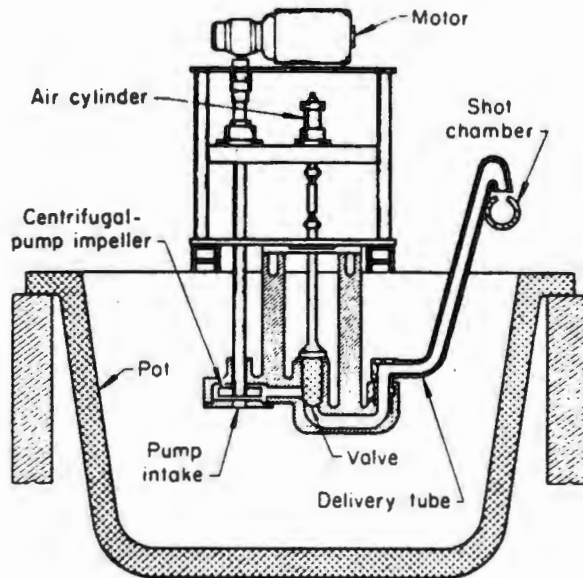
Constant-Pressure Centrifugal Pump for Feeding Molten Magnesium Alloy to the Shot Chamber of a Cold-Chamber Die Casting Machine (Reprinted from [12])
